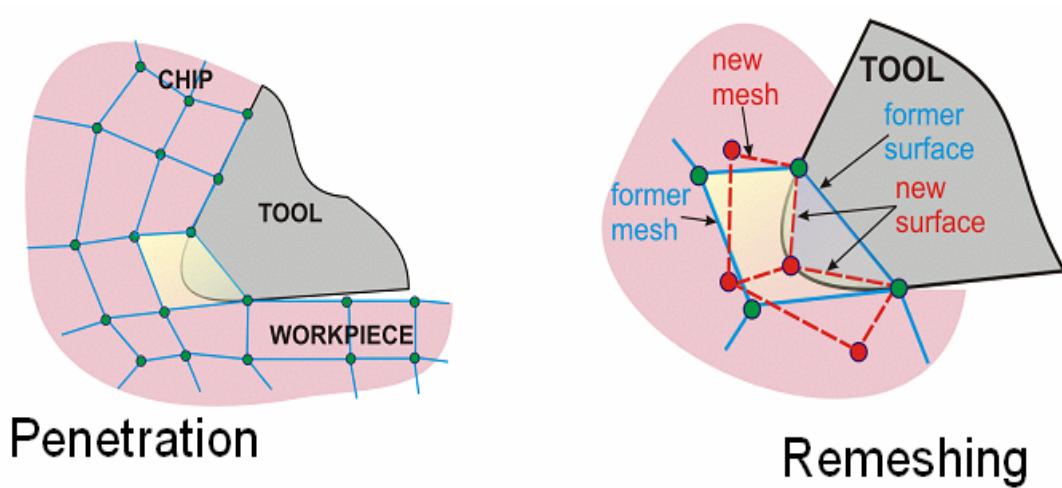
Separation of chip from the workpiece by continuous remeshing.
